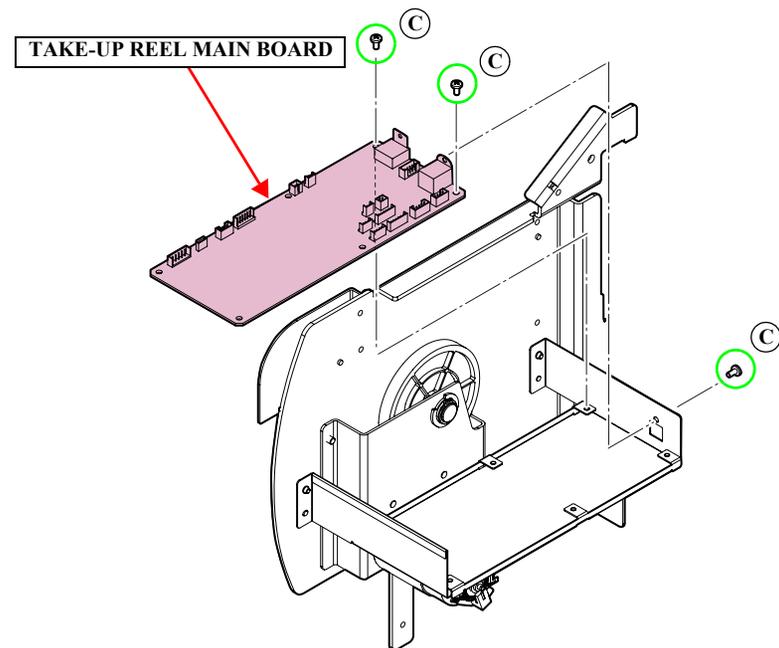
Removing the TAKE-UP REEL MAIN BOARD
